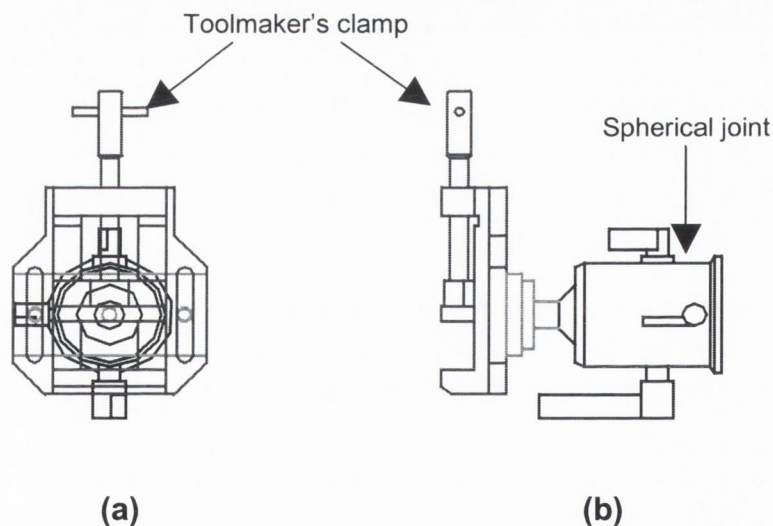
A front view (a) and a side view (b) of the spherical joint and toolmakers clamp which give the insertion machine flexibility in gripping either a tapered prosthetic head or a spherical prosthetic head.
